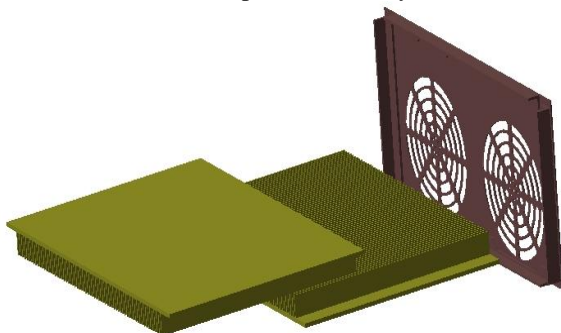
shows the heat sinks used in power amplifier assembly enclosure
